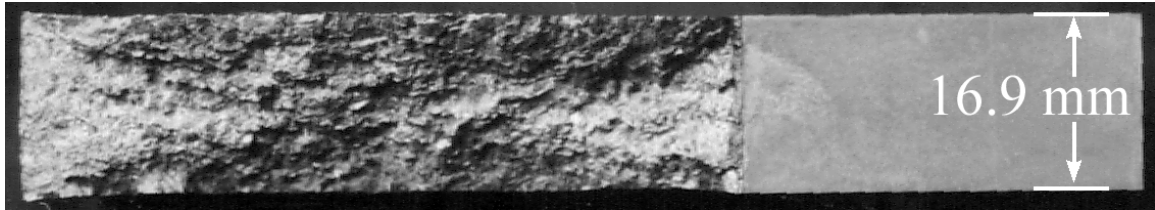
Fracture surface of Timetal 5111 specimen loaded quasistatically.
